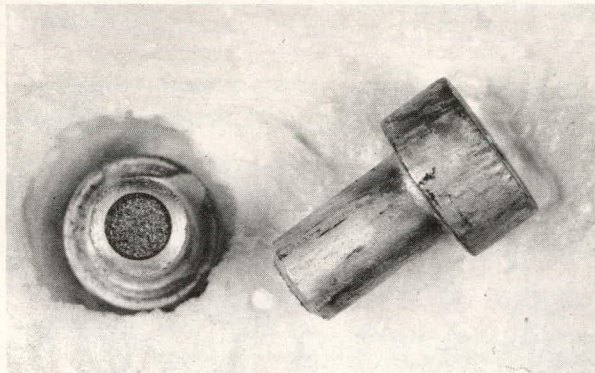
Fracture Surface of Irradiated 212-B Specimen 5 (Charge A); Tensile Test
